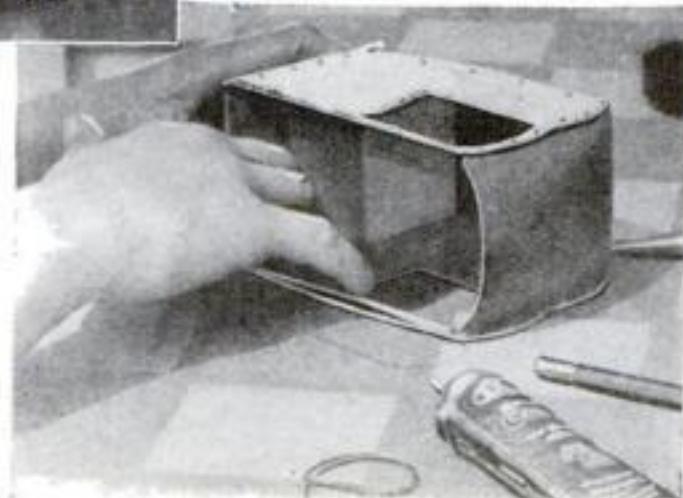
Lining the sides with crimson velvet ribbon. The door is hinged by using a strip of cloth 1/2 in. wide for the hinge. The velvet lining will hide the hinge as far as the window, and a coat of red paint will conceal it the rest of the way. The seat cushions and arm rests are made by covering wood or linoleum blocks with crimson velvet.
